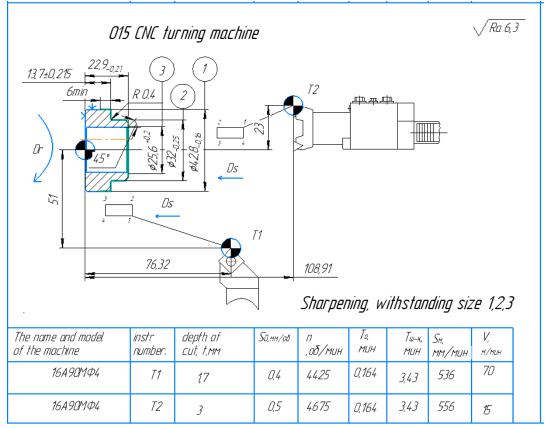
Operational drawing of CNC turning machine in Kompas 3D
